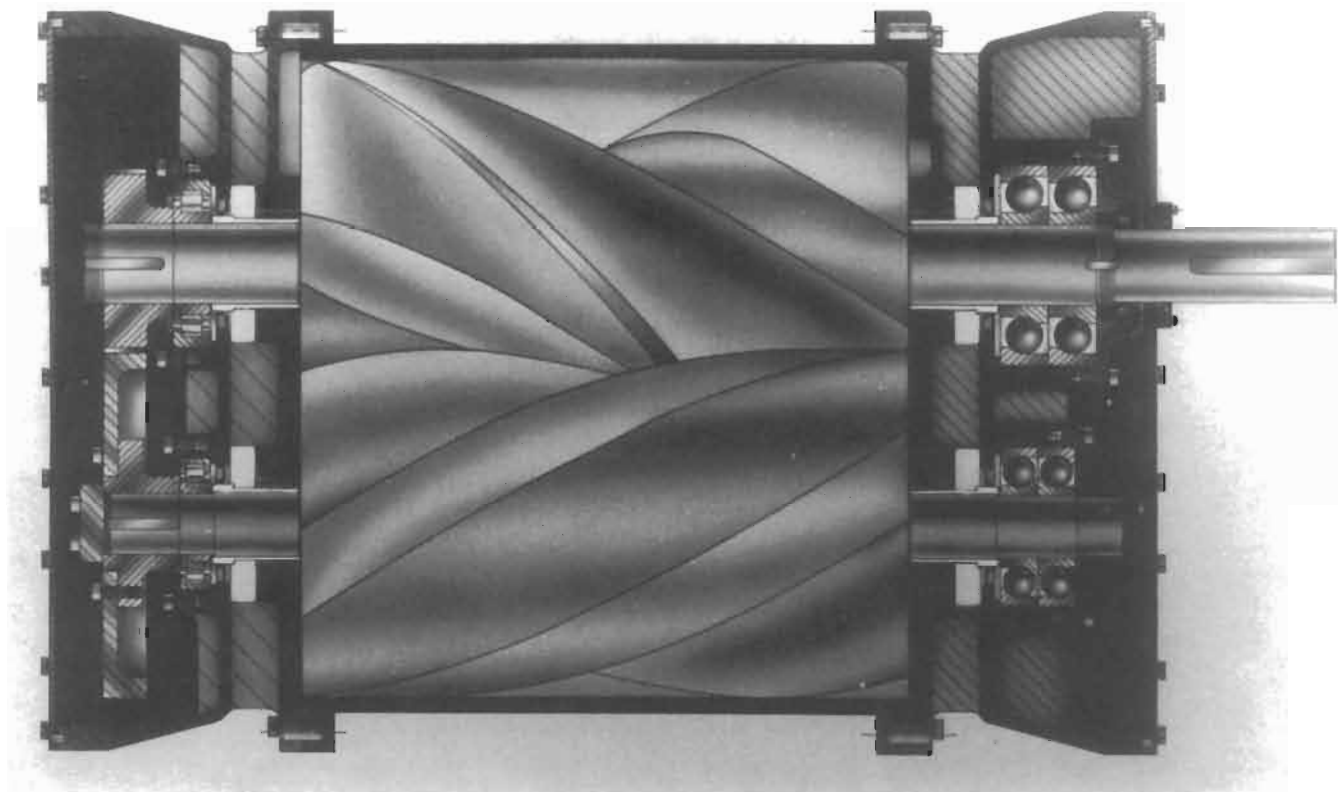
Rotary blower with screw-type rotors. By permission, Gardner-Denver Industrial Machinery-Cooper Industries.
